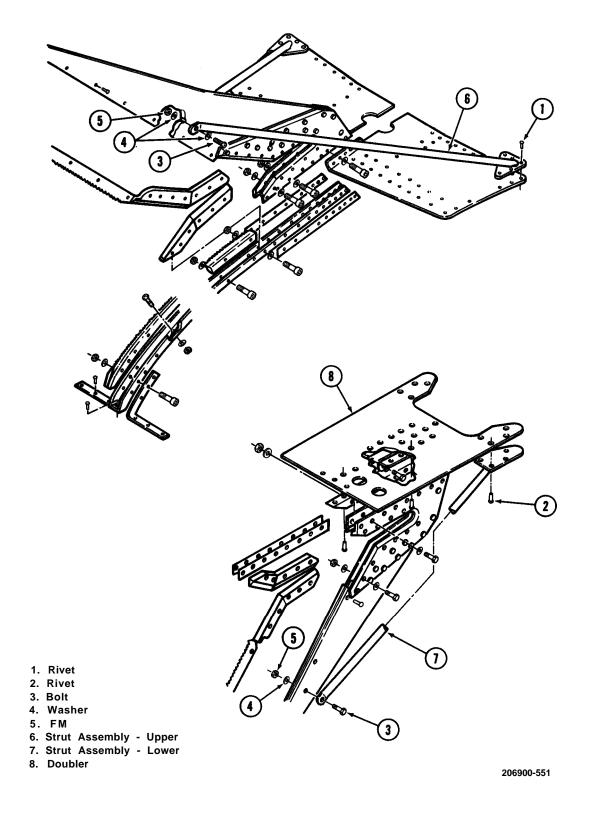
Removal – Strut Assemblies (Upper and Lower)
